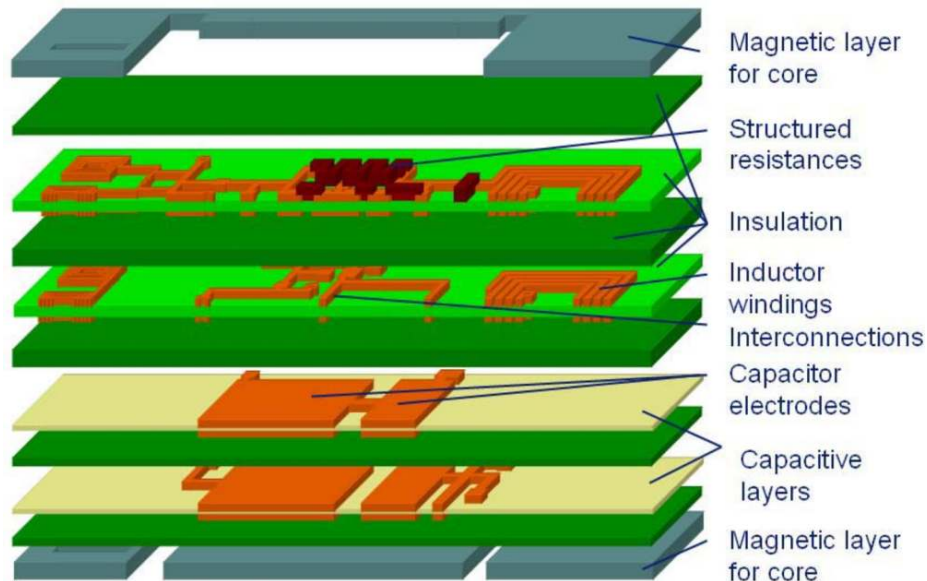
Comprehensive PCB-Integrated Passives Platform[69]
